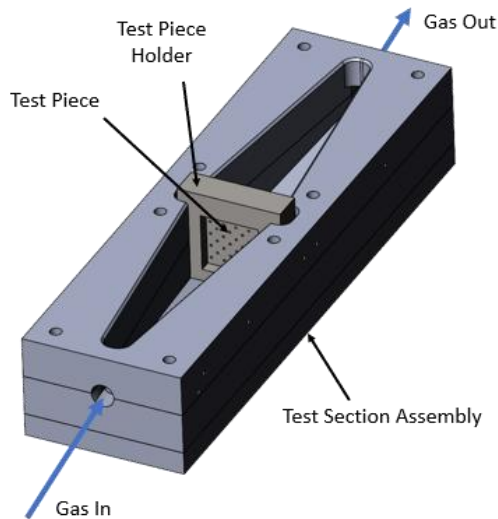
CAD MODEL OF THE TEST SECTION ASSEMBLY WITH TOP LID REMOVED
